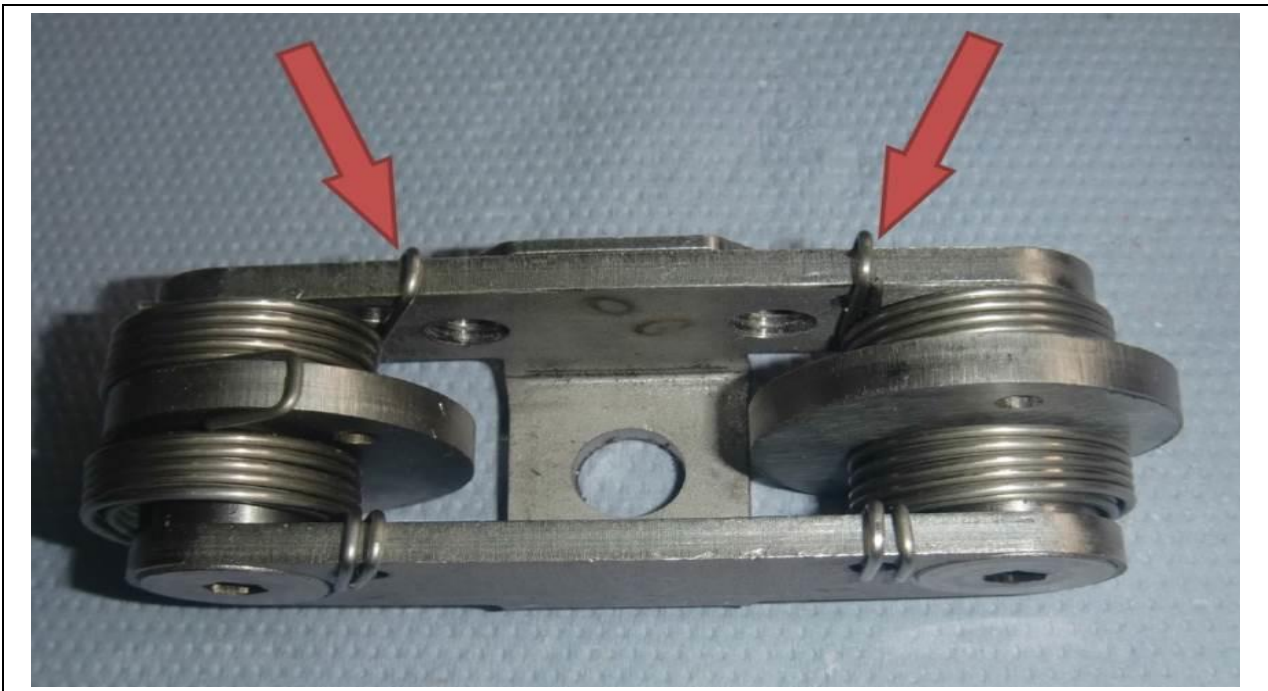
Eccentric adjuster with 75% preload pressure: two hinge springs cut through
